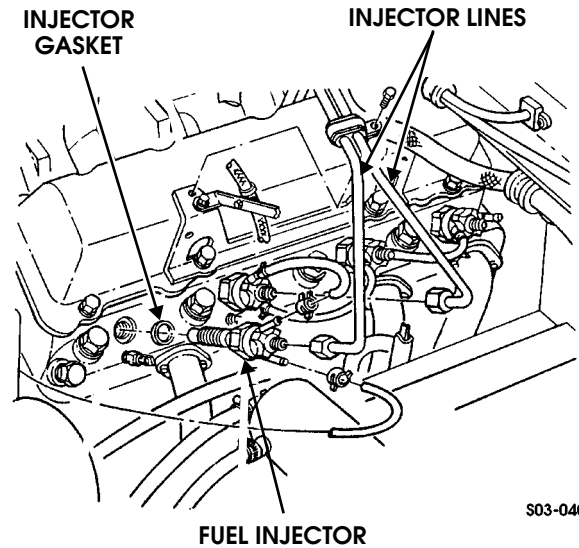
Fuel Injector and Gasket Removal/Installation (NA Diesel Shown)
